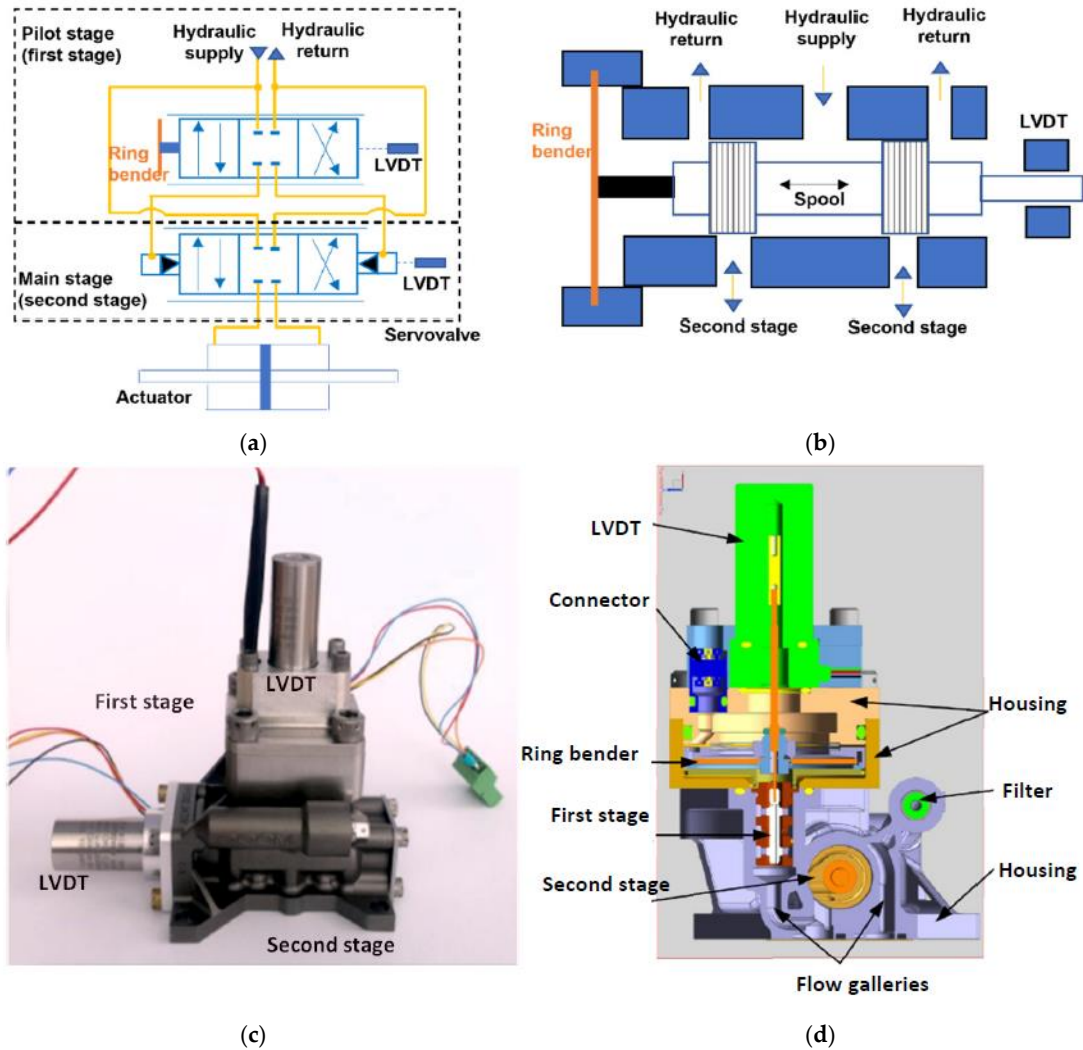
Piezo valve developed in [103], [104], [105]: redrawn hydraulic scheme (a); redrawn first stage schematic (b); new valve prototype photo (c); redrawn valve representation (d).
